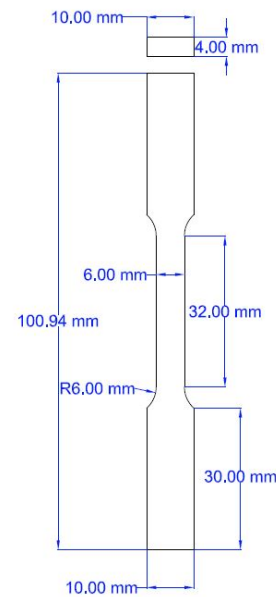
DIMENSIONS OF FABRICATED SPECIMENS
